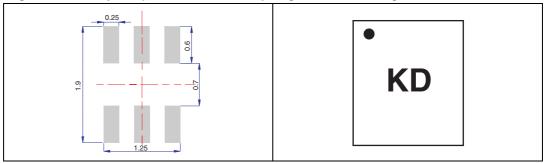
Footprint (dimensions in mm) Figure 19. Marking
